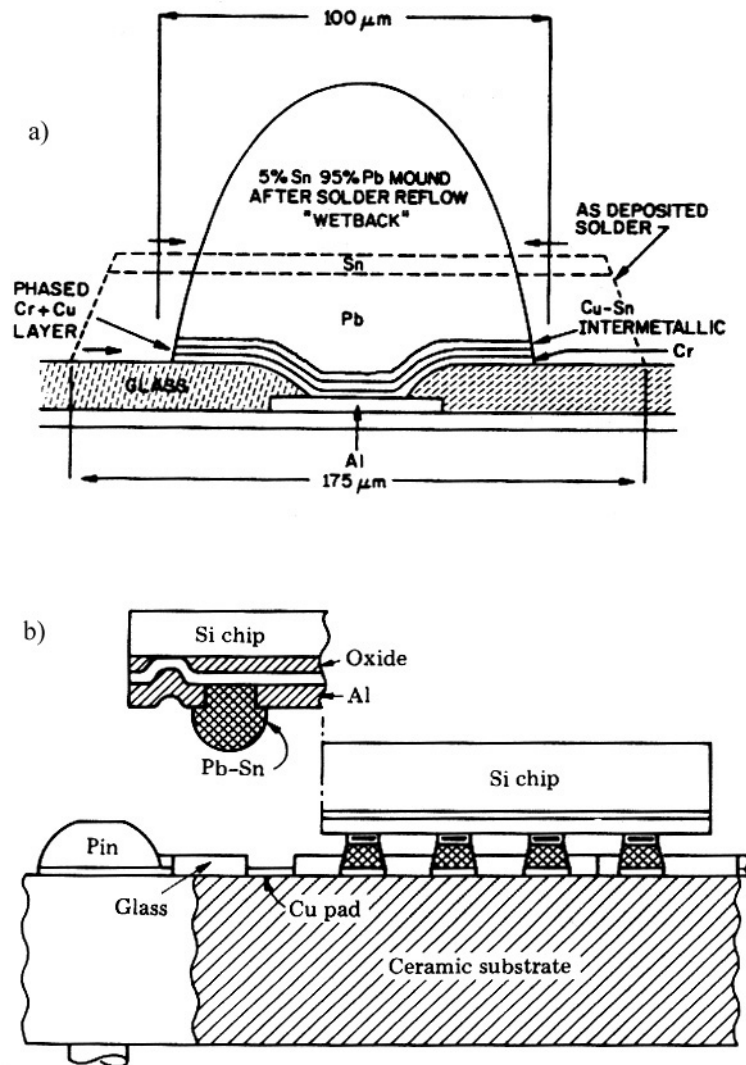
Flip chip soldering: a): The metals for the solder bump before reflow (dashed lines) and after reflow; b): Bump before the soldering of the chip onto the substrate and after soldering.
